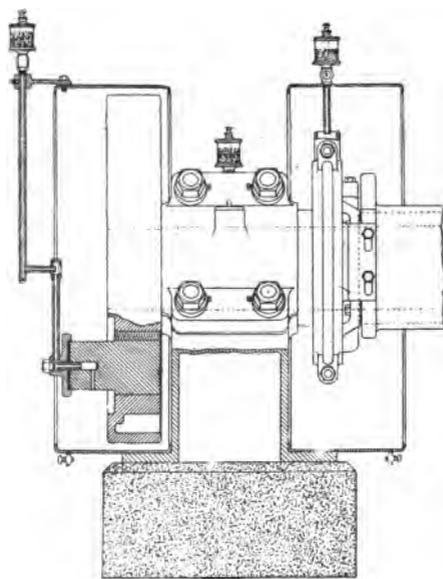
"RUSSELL" ENGINE—SHOWING ARRANGEMENT OF OIL GUARDS.
